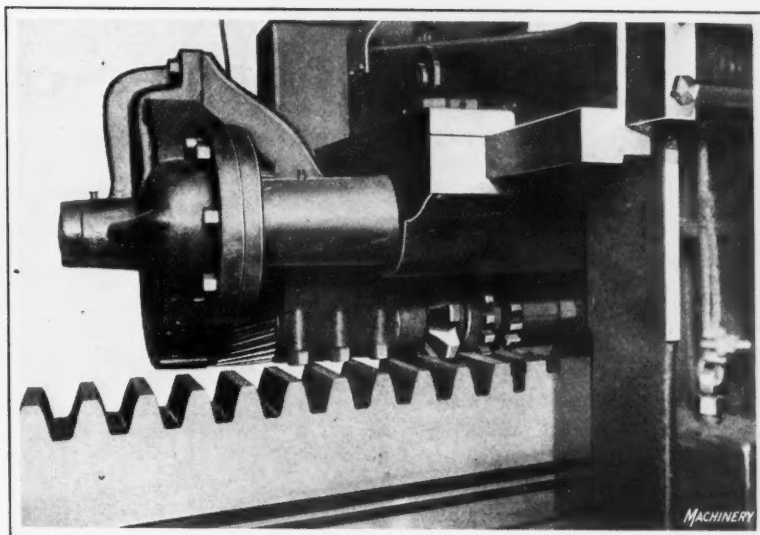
Close-up View of Rack-cutting Operation shown in Fig. 3
